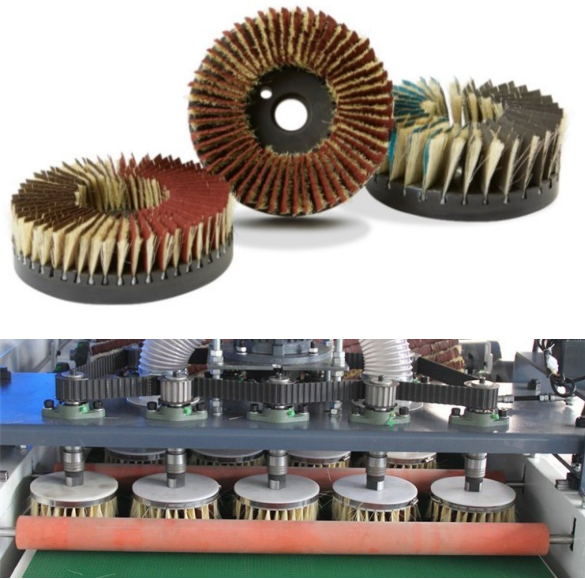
Top – type of sanding disc brush used in edge sanding unit. Bottom – wood polishing machine with disc brushes.
